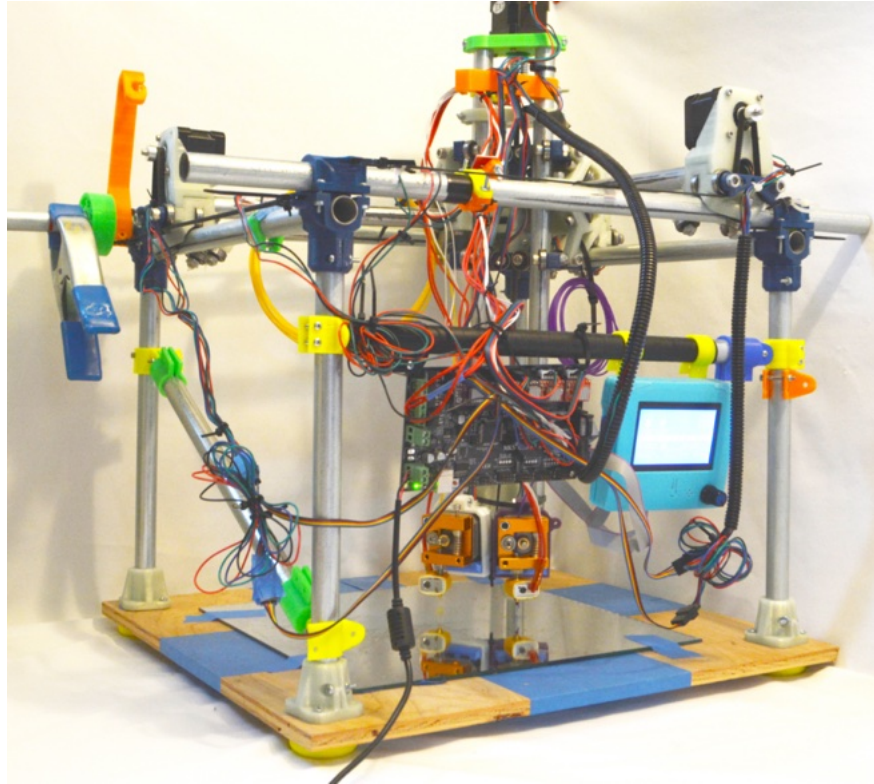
MPCNC printer with modifications (dual extruder mount) to support basic dual extrusion.
